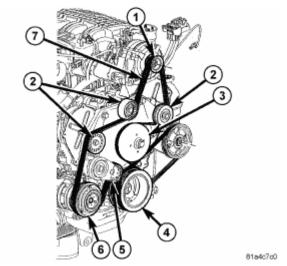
Accessory Drive Belt Routing Courtesy of CHRYSLER LLC
